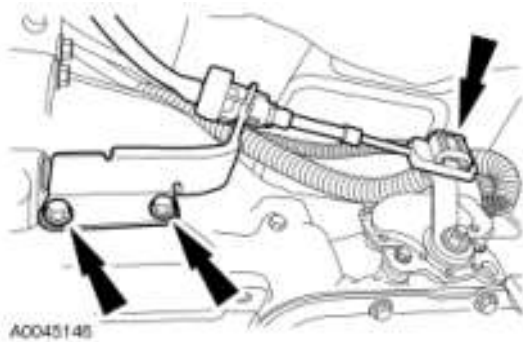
Identifying Shift Cable End And Shift Cable Bracket
